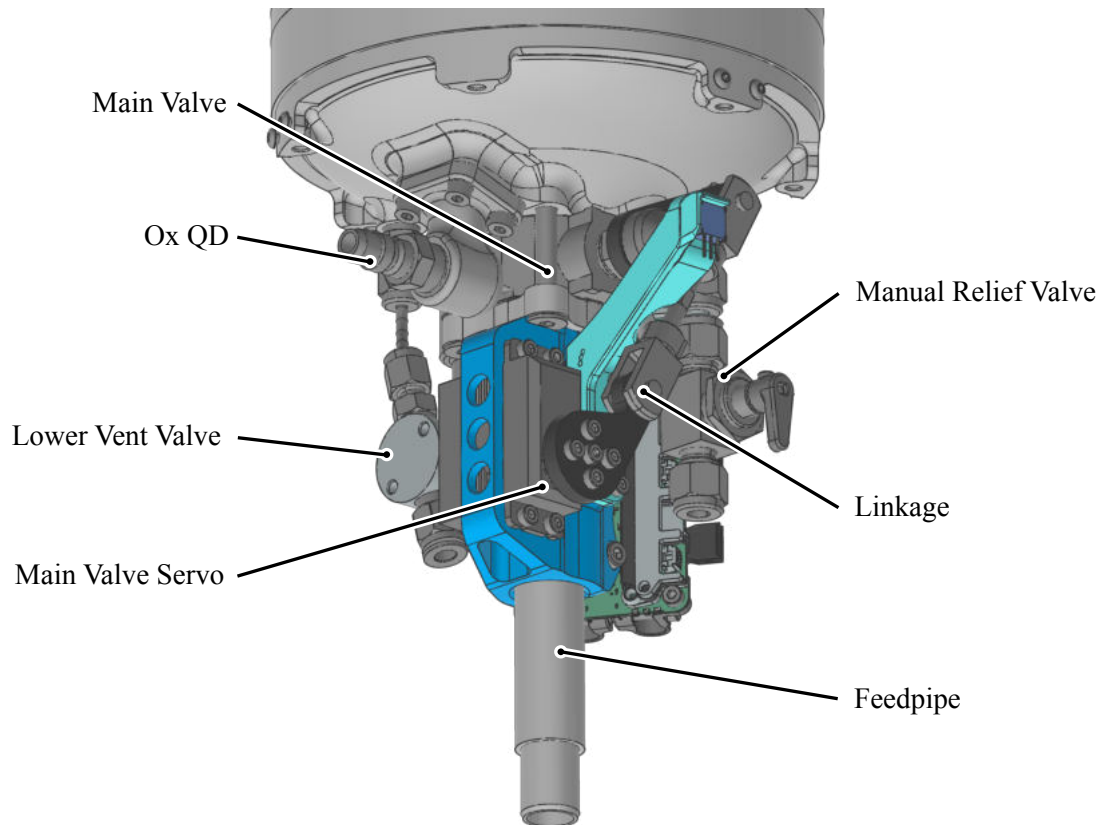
The lower bulkhead and the lower fluid assembly with the main valve and the feed pipe.
